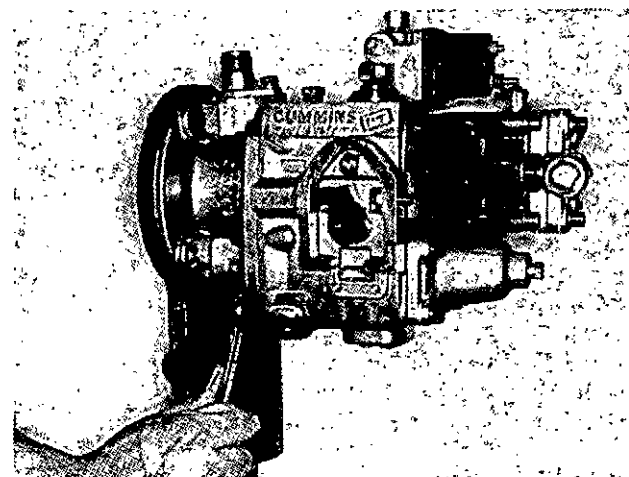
, (F5306). Remove the front drive cover from the AFC pump.
